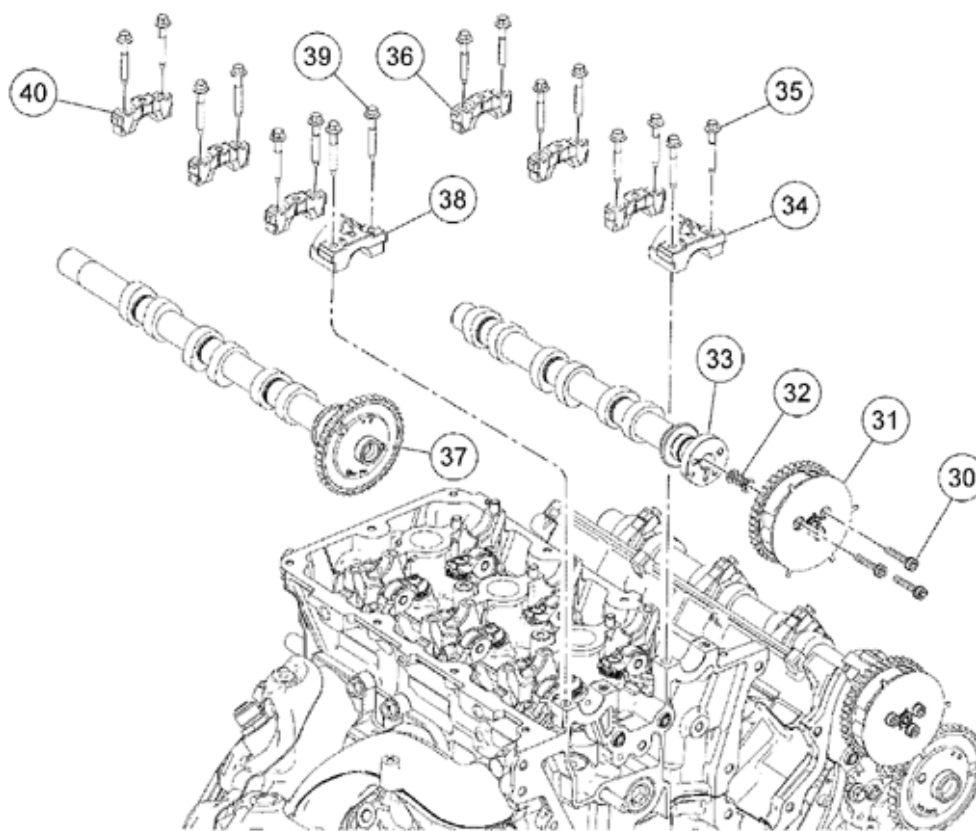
Exploded View Of RH Side Intake And Exhaust Camshaft Components
